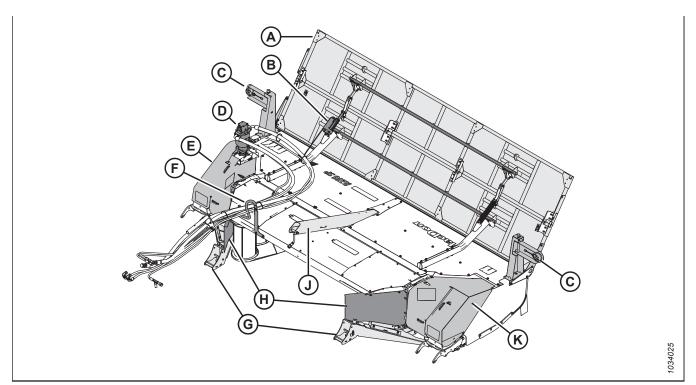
R216 Rotary Disc Header – Grass Seed Header
